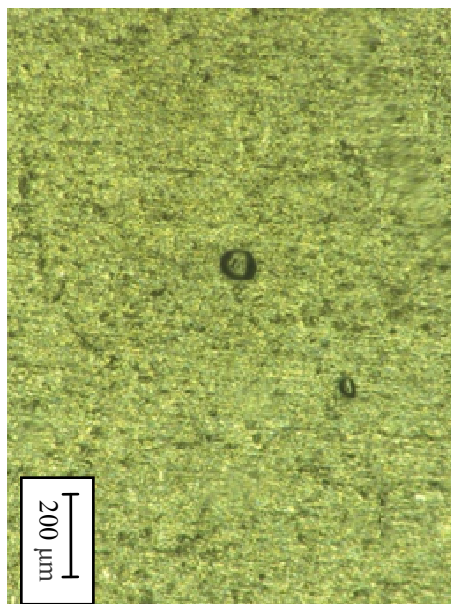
Only few small bubbles can be found in the U-LAMP specimens produced by an open-channel tool with offset 0.5 mm to the left of the joint centreline.
